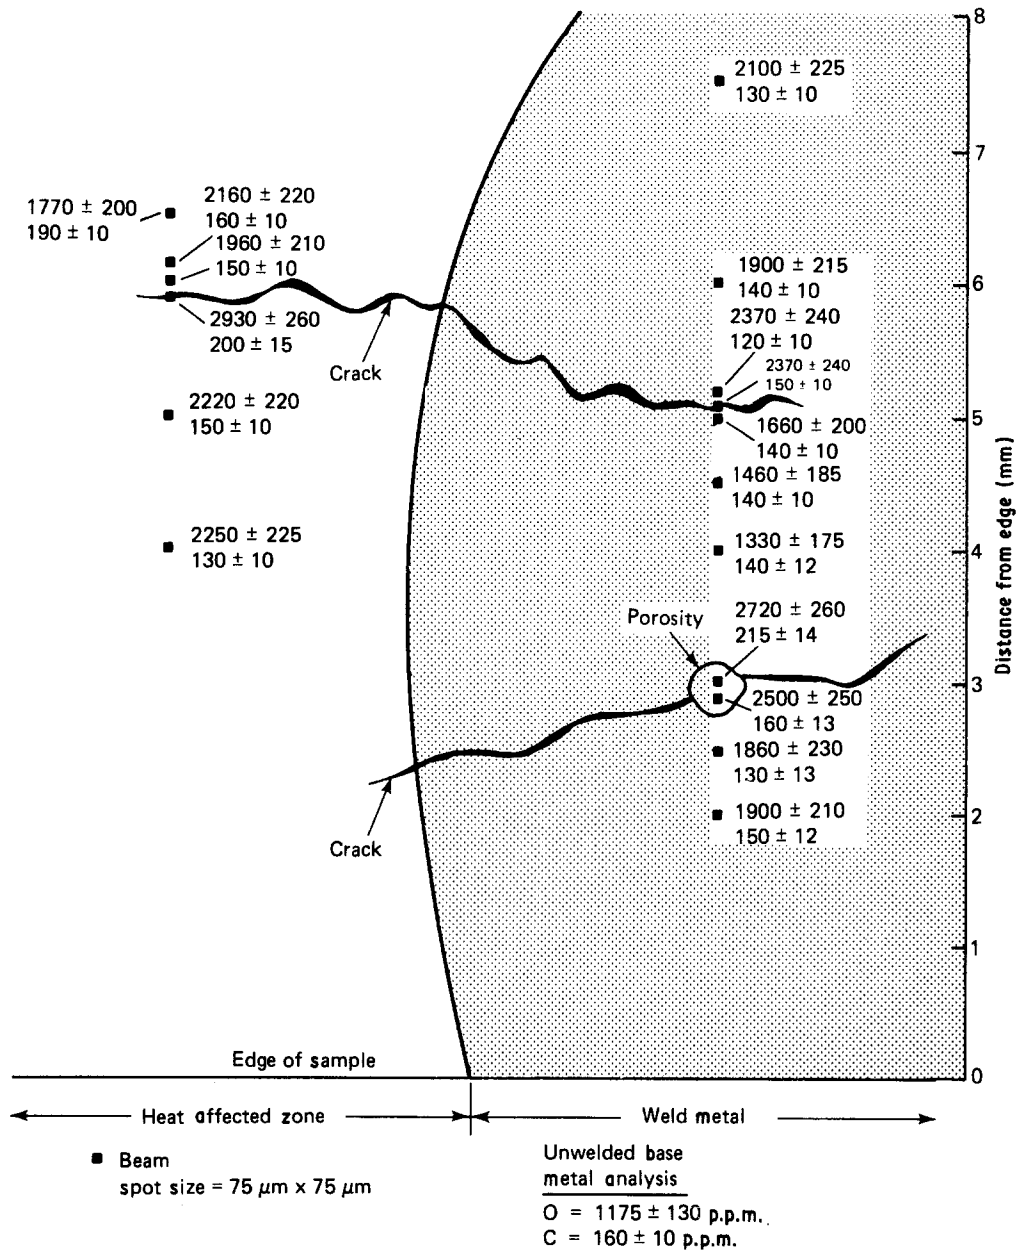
Oxygen/carbon analysis on top weld surface – Sample A.
